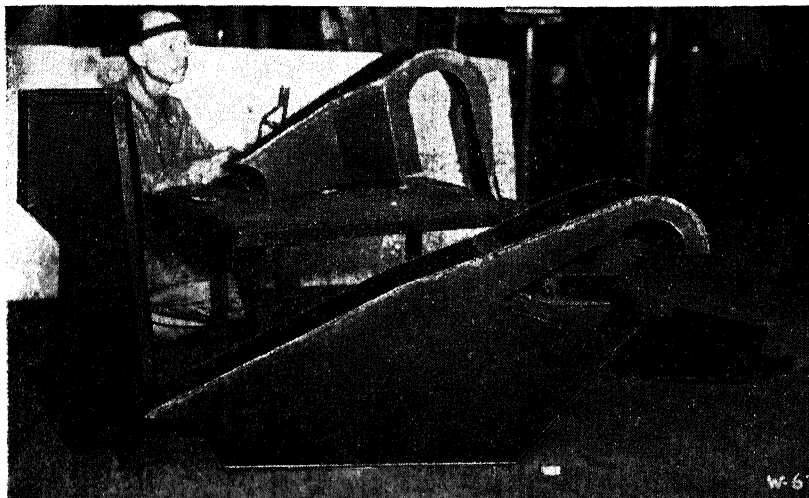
Machine guards built from black iron by shielded arc welding with Type B electrodes.
